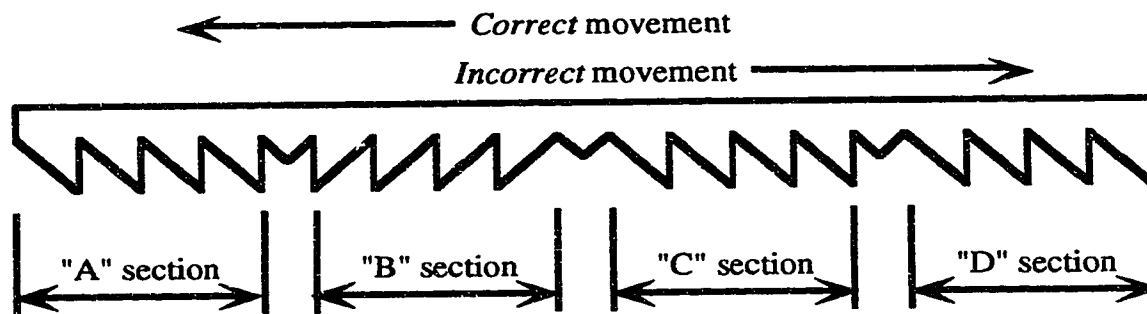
Example of a rack from Pressey's teaching machine of 1927
